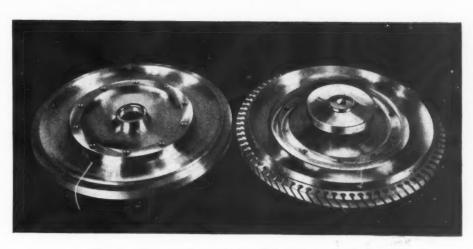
Air-compressor Rotor Wheel of a Jet Engine before and after the Broaching of Slots in Its Periphery
